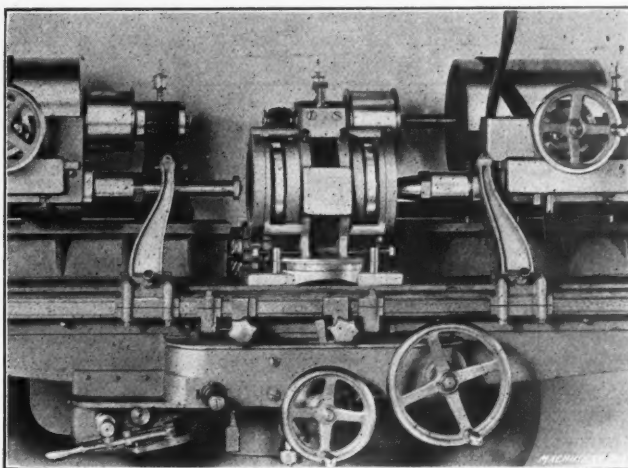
Special Headstock for Holding Pneumatic Hammers, Long Bushings, etc.
